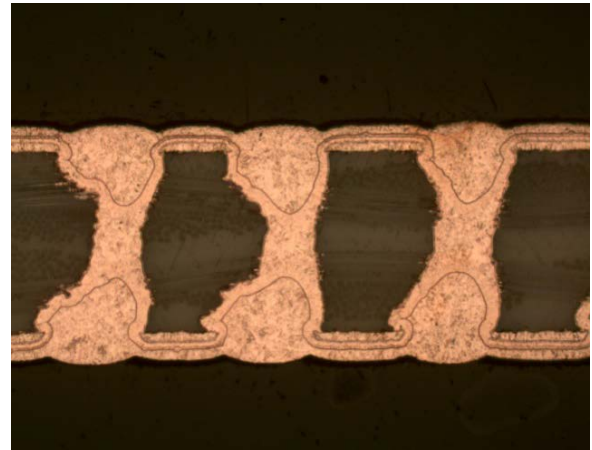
CROSS-SECTION AFTER BRIDGING AND VIA FILLING STEP
